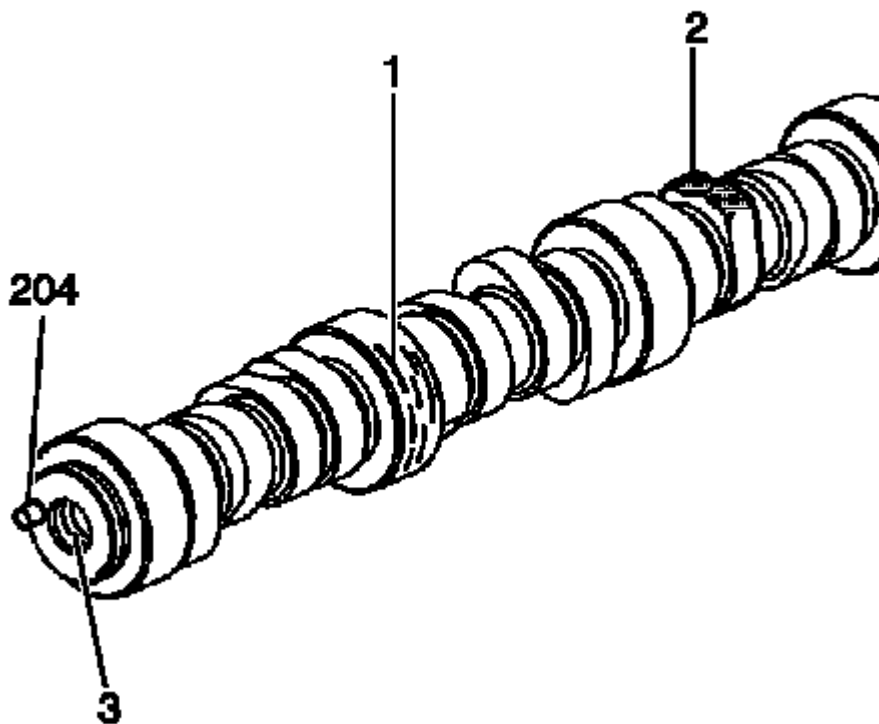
Identifying Camshaft Inspection Areas
